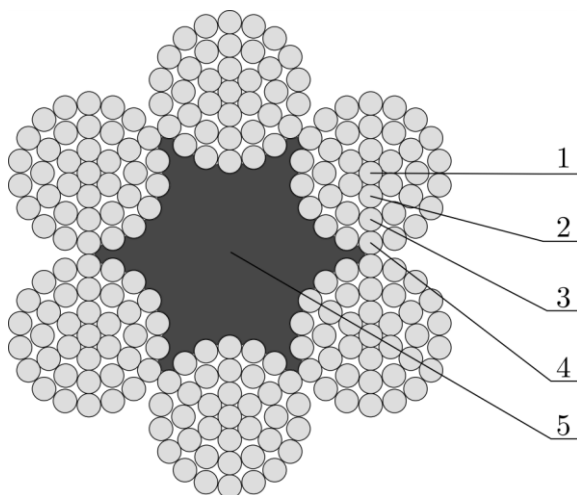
Cross section of 6x37M-SFC steel wire rope
